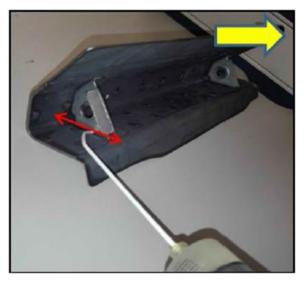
Cut-away illustration of the internal area of the Krytox™ application on rear bracket.
